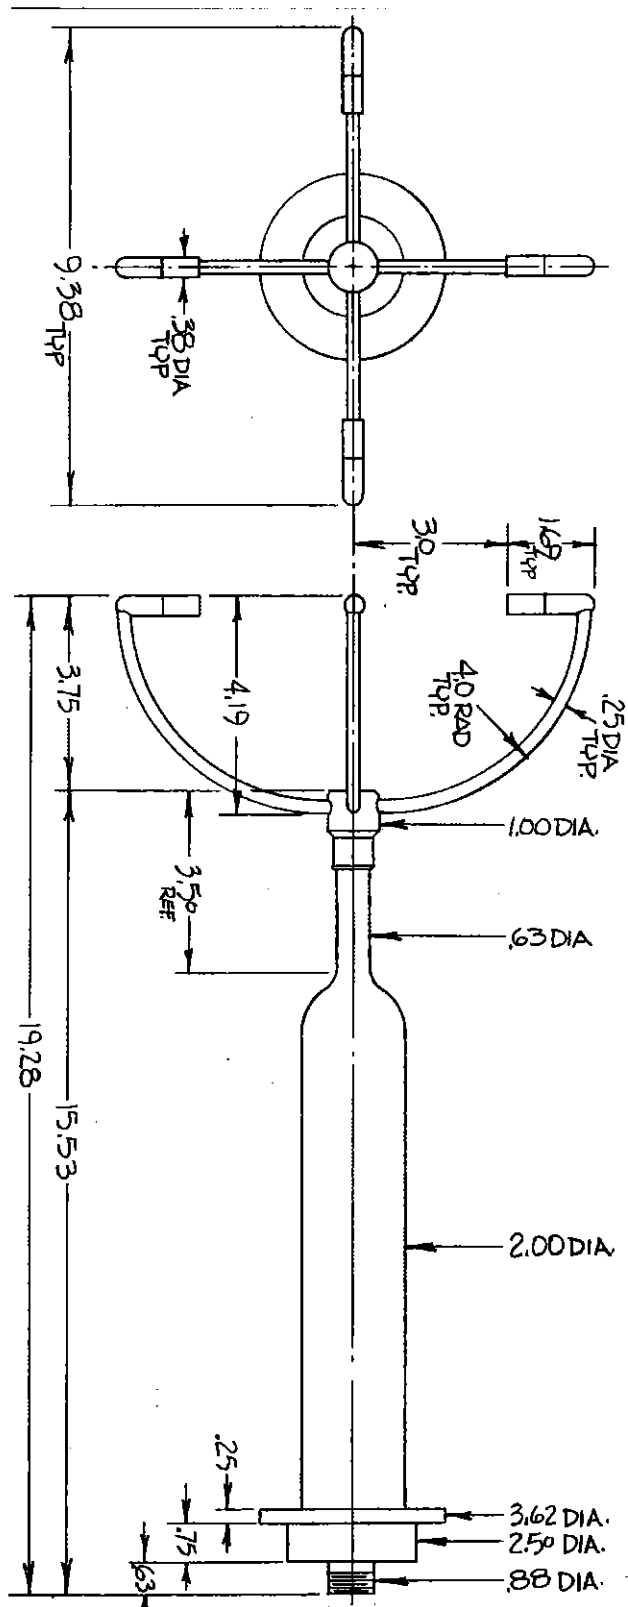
50.5 Wind Sensor Outline Dimensions
